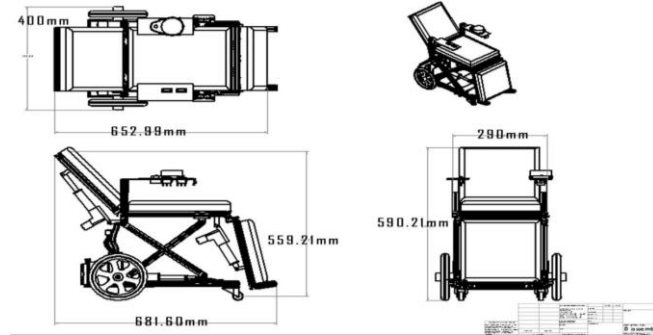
CAD-based orthographic and isometric dimensional views of the multi-posture wheelchair, showing key structural dimensions
